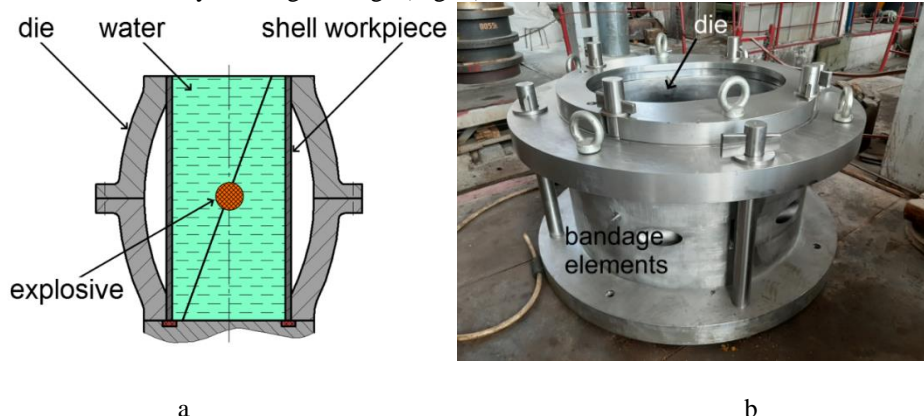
Explosive forming tool: a – a typical scheme of forging a shell workpiece with an axisymmetric arrangement of the explosive charge; b – tooling design
